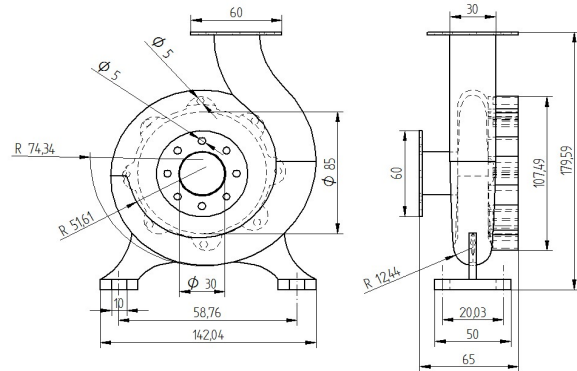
Design elements and dimensioning details of the centrifugal pump assembly (dimensions in mm).
